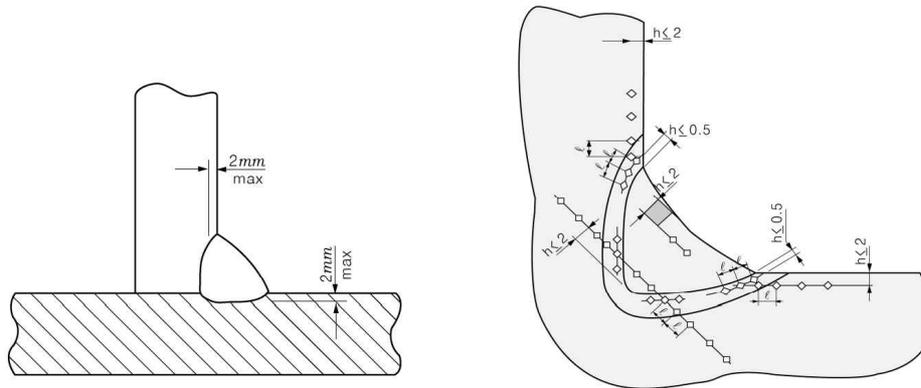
Hardness test for fillet welded joint(unit : mm)
